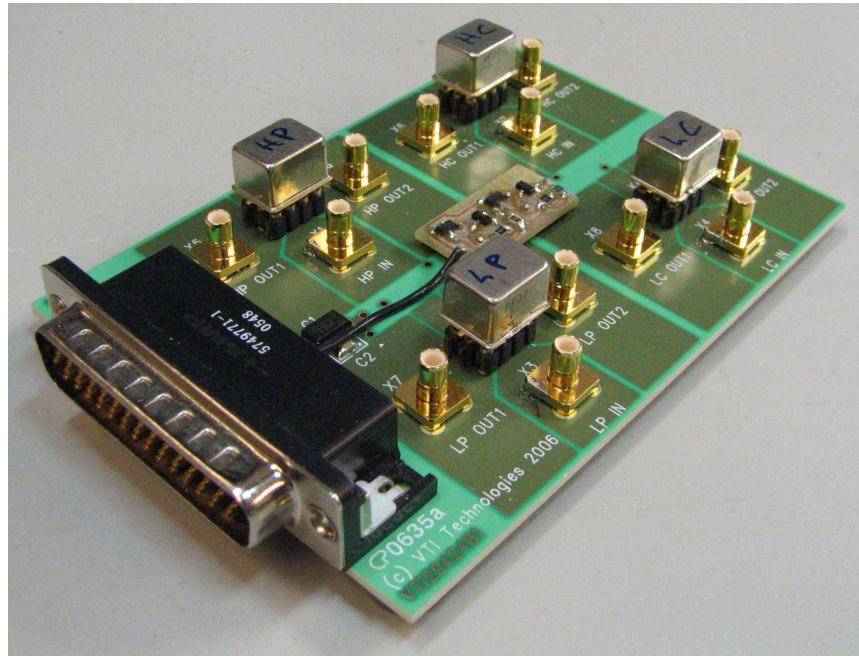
Photo of the MUX card. The segmented guard planes for each coaxial SMB connector can be seen. The prototype in the photo had an error in the PCB, which was corrected with the small self milled PCB mounted on top.
